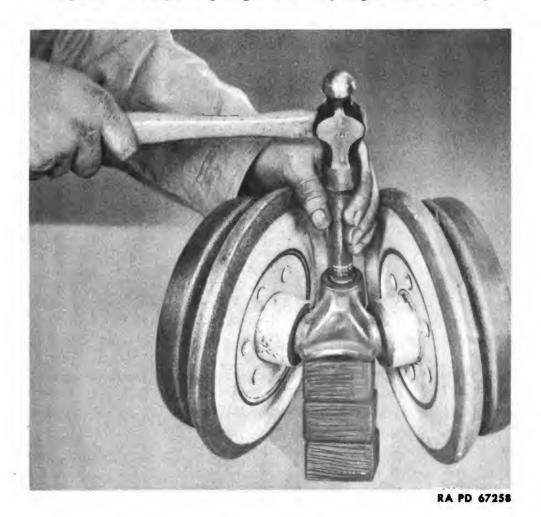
Replacing Bogie Wheel Support Bracket Bushing
